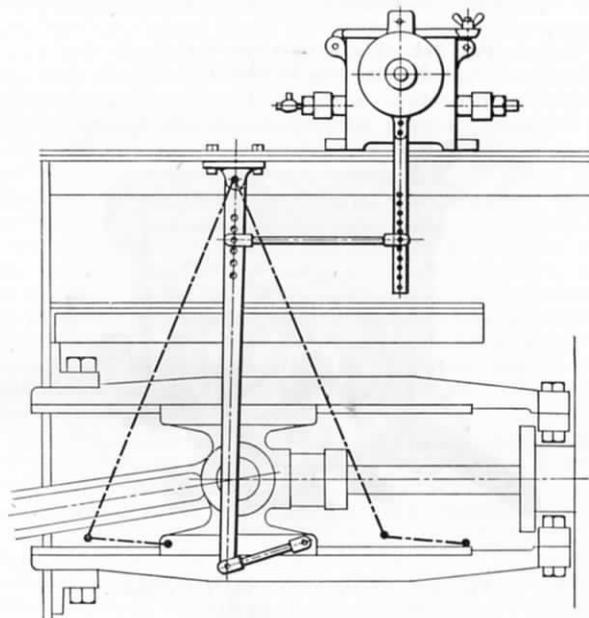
MECHANICAL LUBRICATOR DRIVEN FROM CROSSHEAD.
